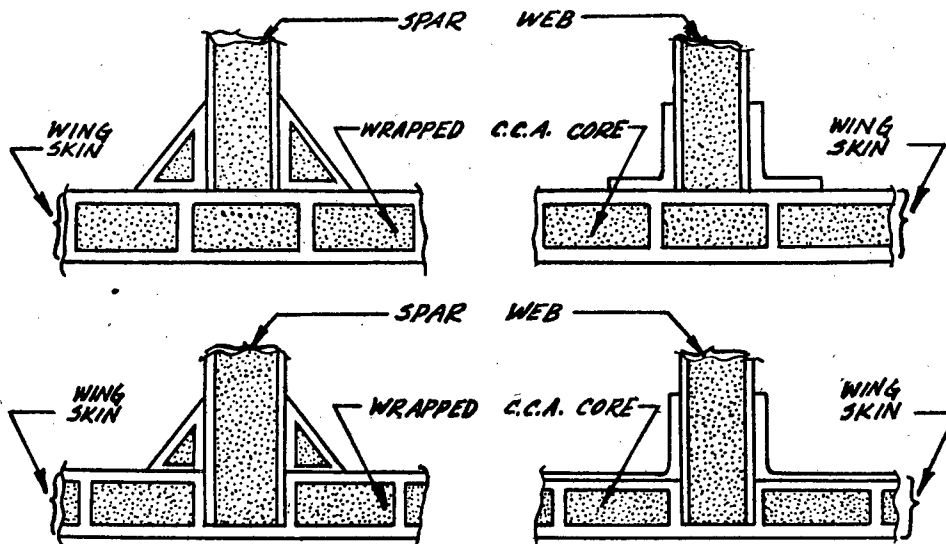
Typical attachments for sandwich parts having glass-cloth facings.
